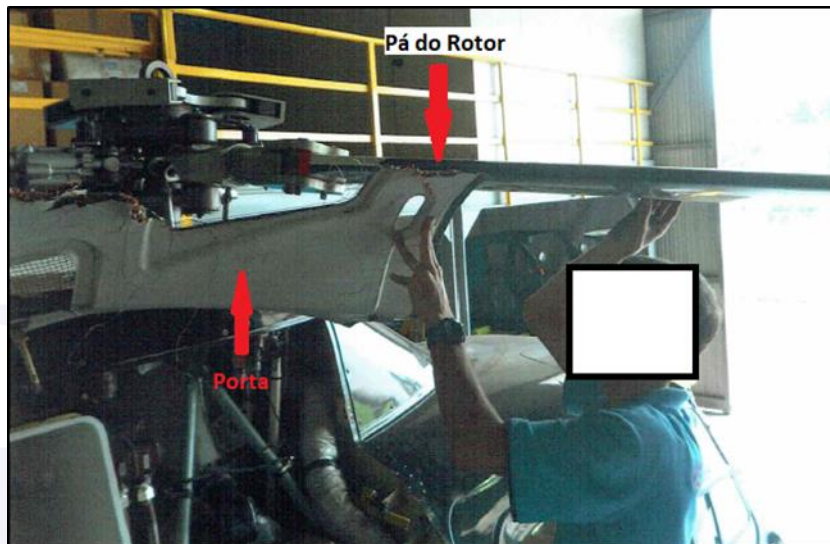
Alignment between the fairing fracture and the rotor blade.
